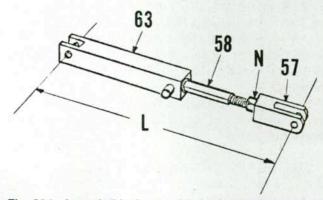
Length (L) of assembled actuator rod must be adjusted to 13.77-13.80 inches (349.6-350.4 mm). To adjust, loosen locknut (N) and turn hex rod (58) in yoke (57).
